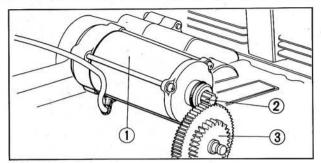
① Starting motor ② Starting motor shaft gear
